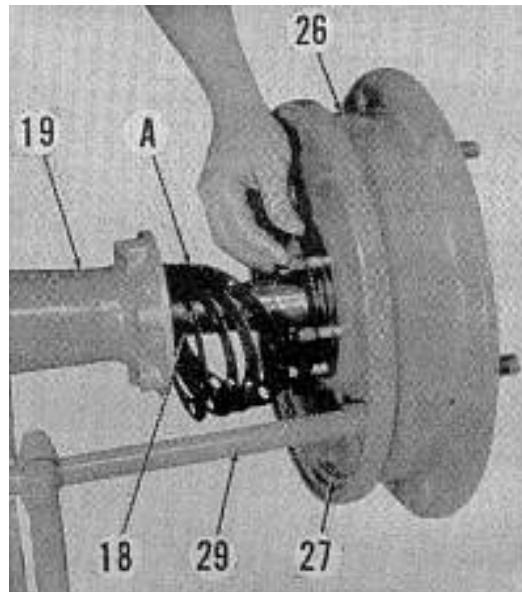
Removing axle shaft and brake assembly on models 2N-9N to adjust end play of wheel axle shafts. (See Legend above)
